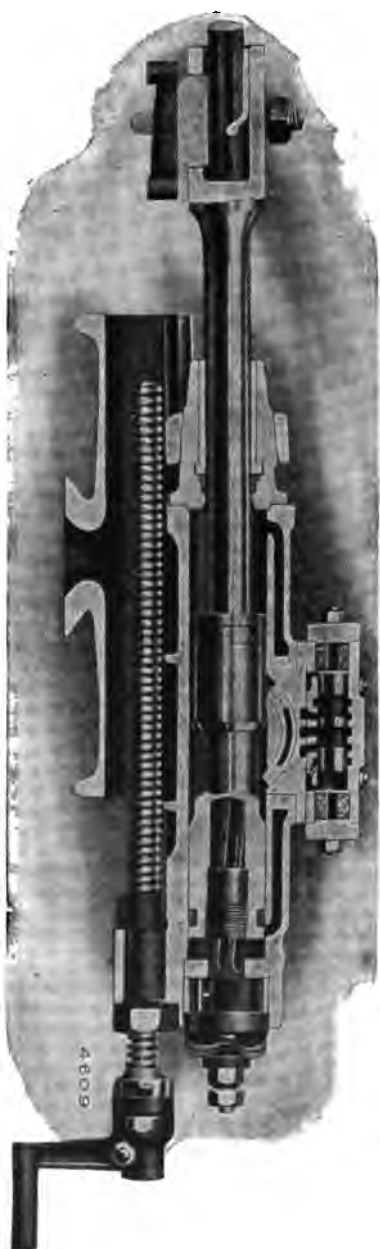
SEC. 102.—Sectional view of Sergeant rock drill, made by the Ingersoll-Rand Company.
